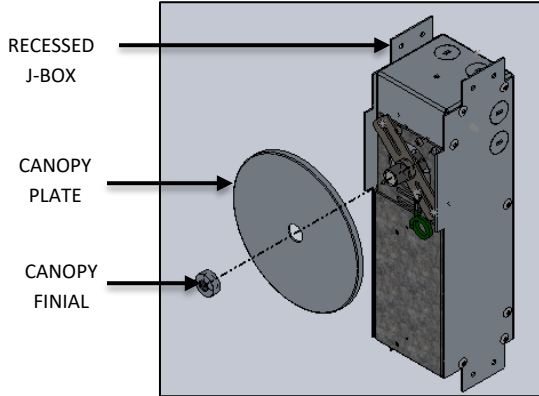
FINIAL AND CANOPY DISASSEMBLY
